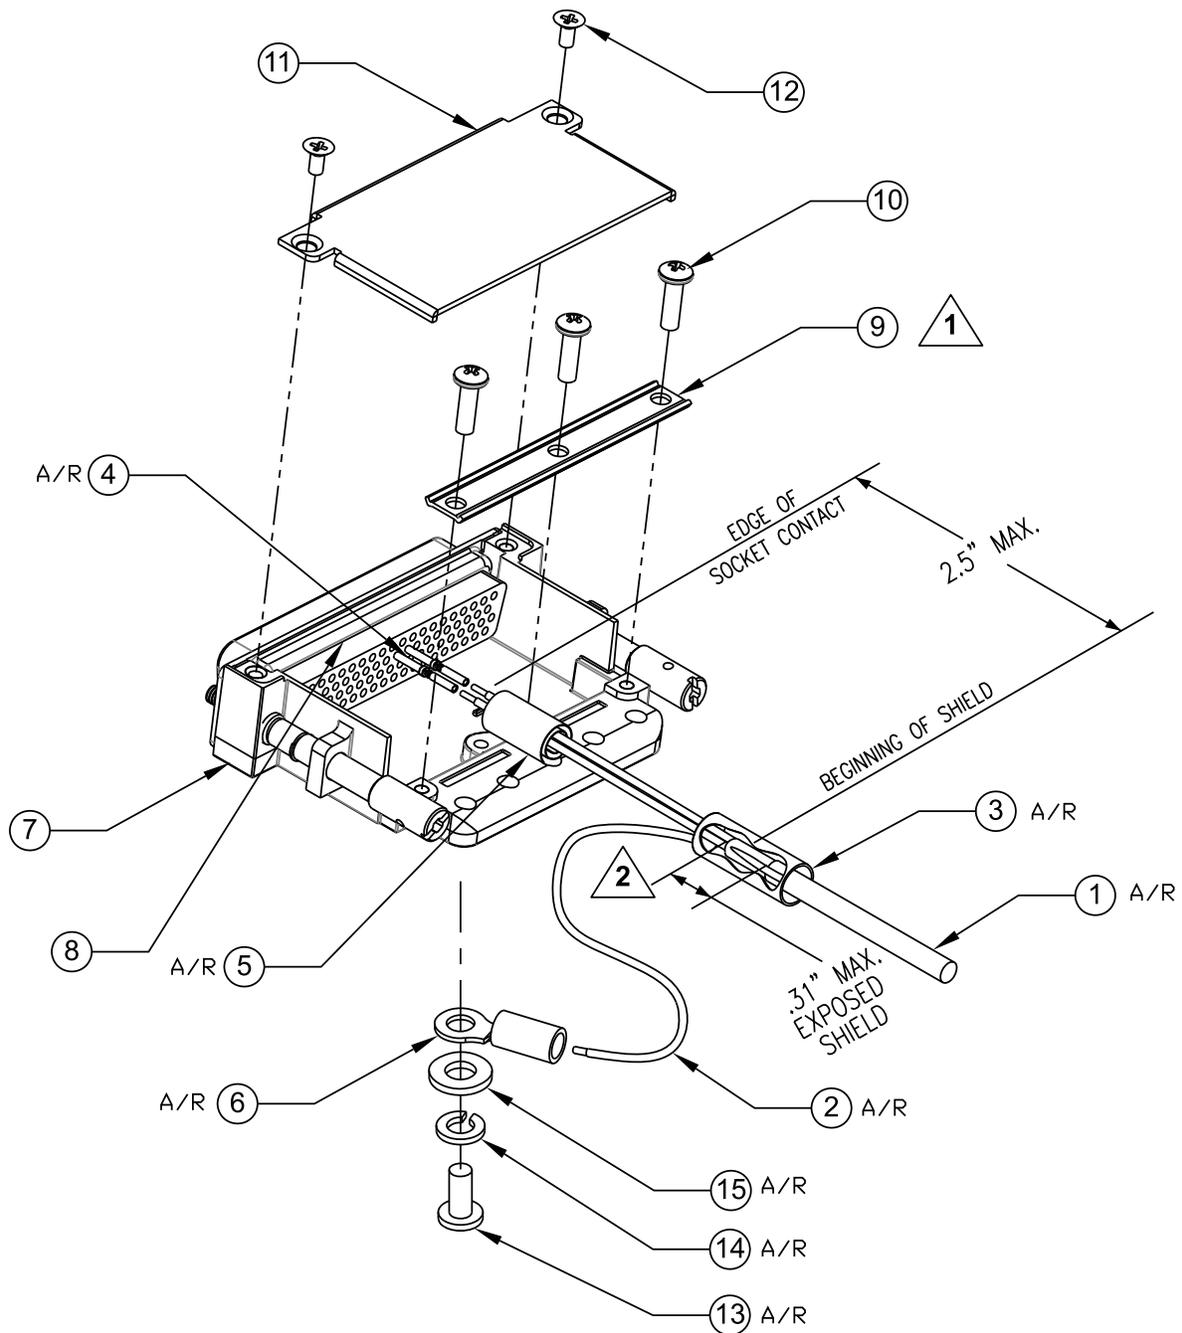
Jackscrew Backshell and Shield Block Assembly
